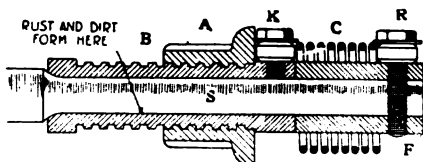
Bendix drive troubles may develop from rust and dirt collecting on the inner drive shaft and sleeve. This should be cleaned out by means of emery paper, being careful no trace of emery is left.
